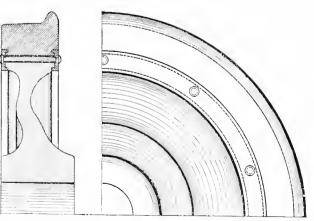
Fused Coach Wheel. Cast Iron Plate Center with Tire Secured by Welding.
